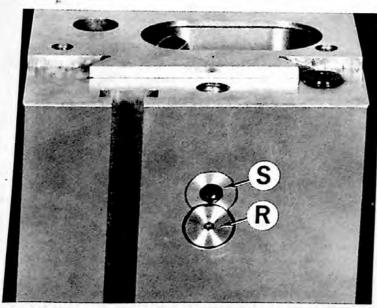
Lock Screw and Slide Stop Pin for Tool Post Slide
